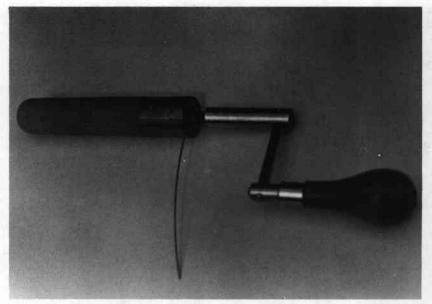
Winding the string onto the wrest pin, with the wrest pin holder and stringing handle.
